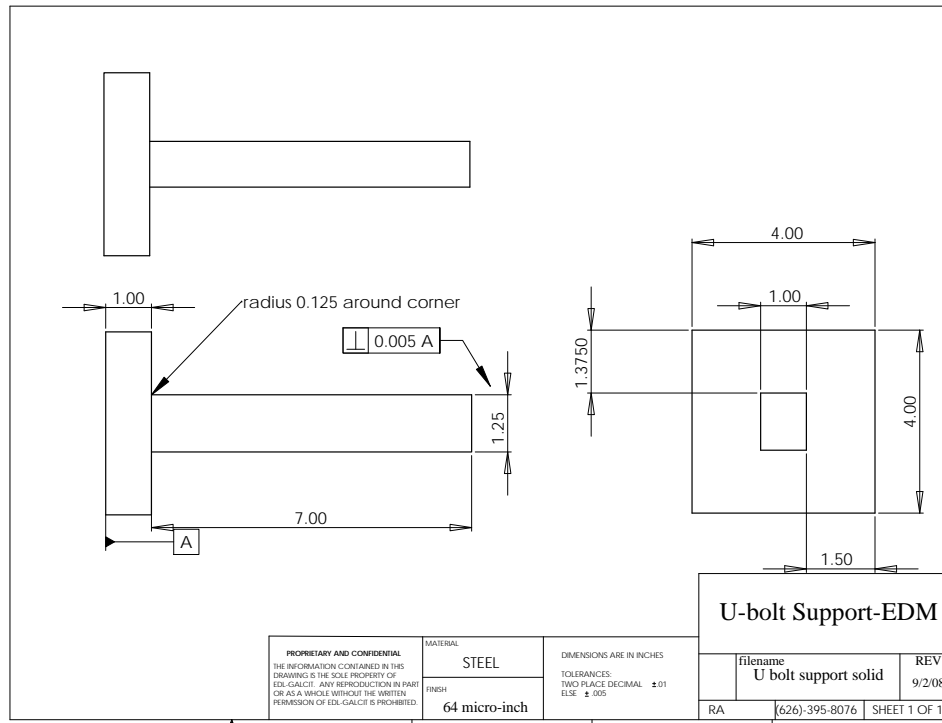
Fabrication drawings used to construct cantilever beams from a single billet of steel.
